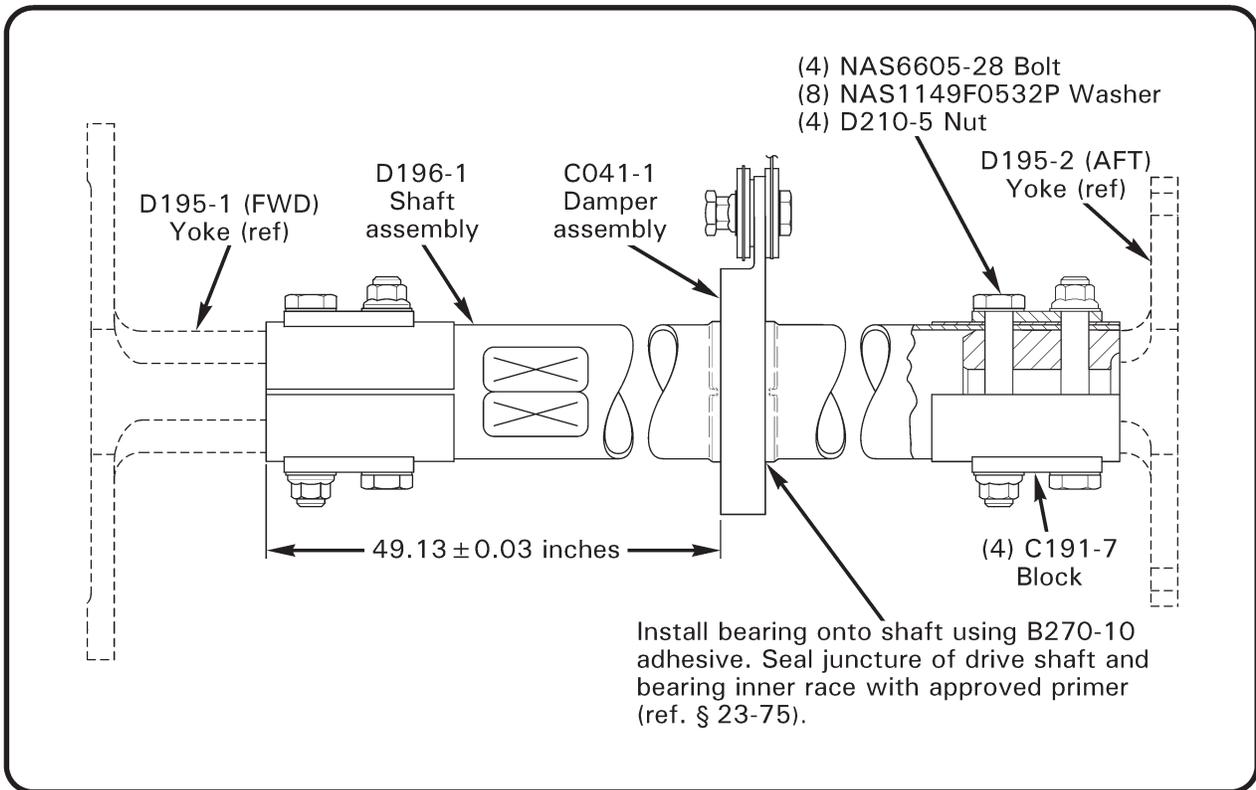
A D196-1 TAIL ROTOR DRIVE SHAFT
